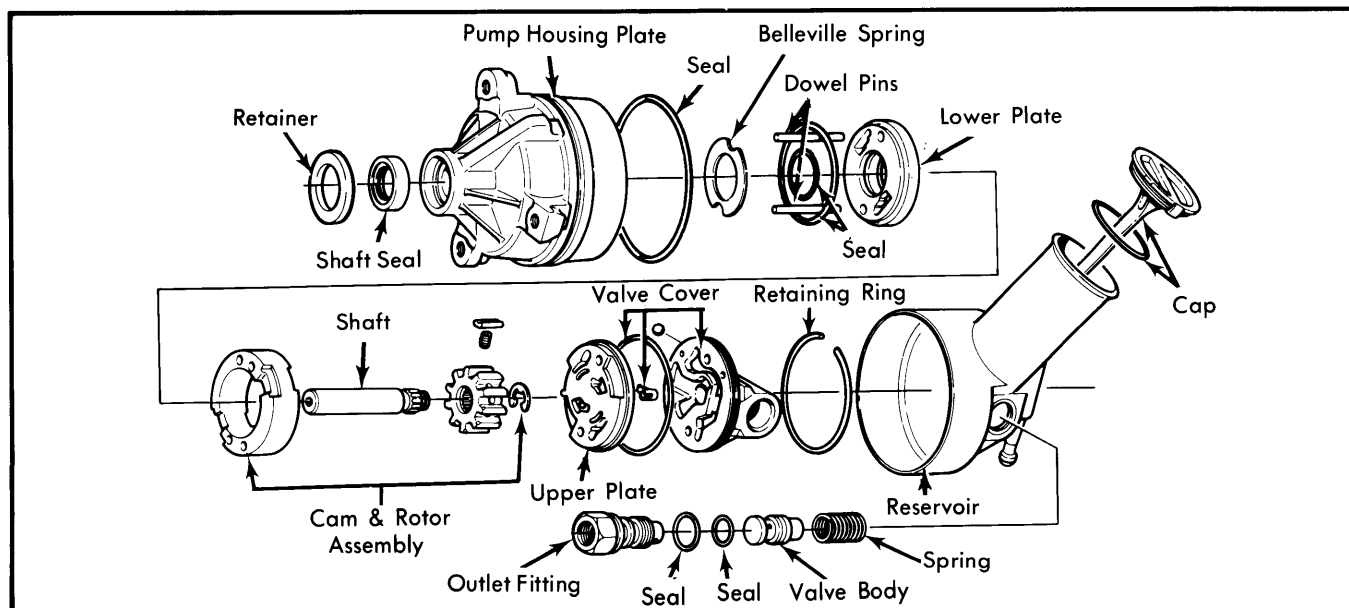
Exploded View of Ford Motor Co. C-II Power Steering Pump
